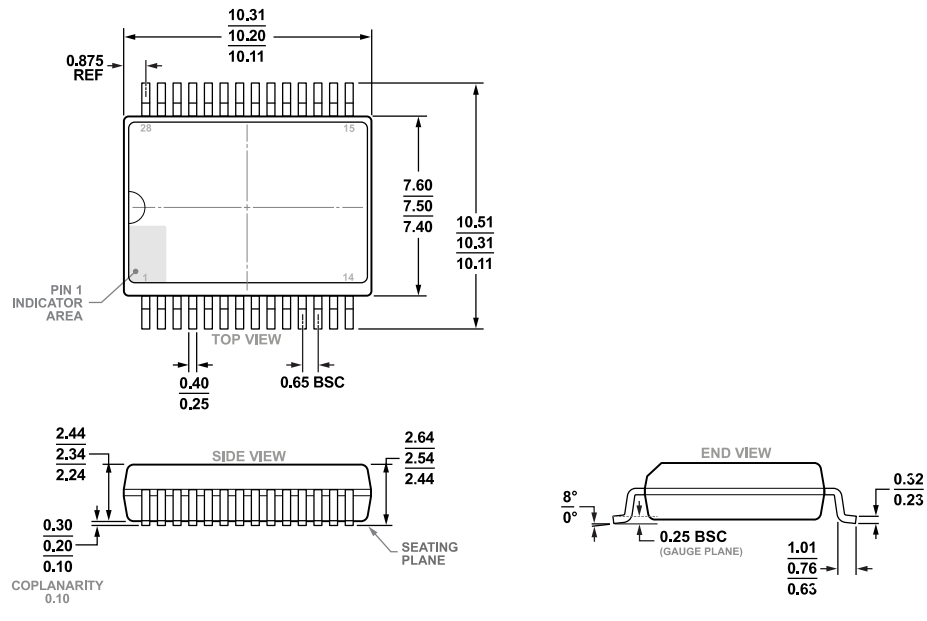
28-Lead Standard Small Outline, Wide Body with Finer Pitch [SOIC\_W\_FP] (RN-28-1) Dimensions Shown in millimeters
